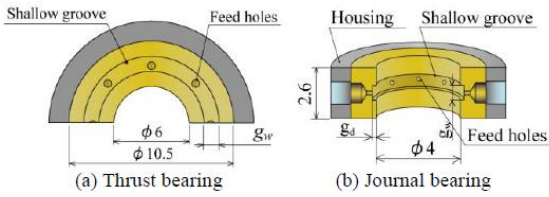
Geometrical configuration of an aerostatic bearing for a micro milling spindle
